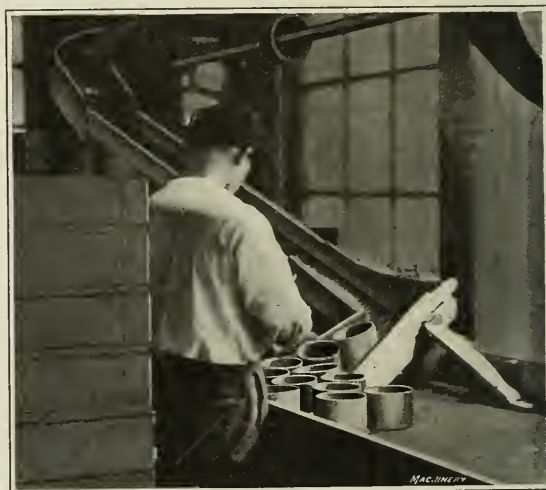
One Type of Conveyor System used which carries Cases from Press to Machining Department—Inspector stands at End of Chute and gages Each Case as it comes through
